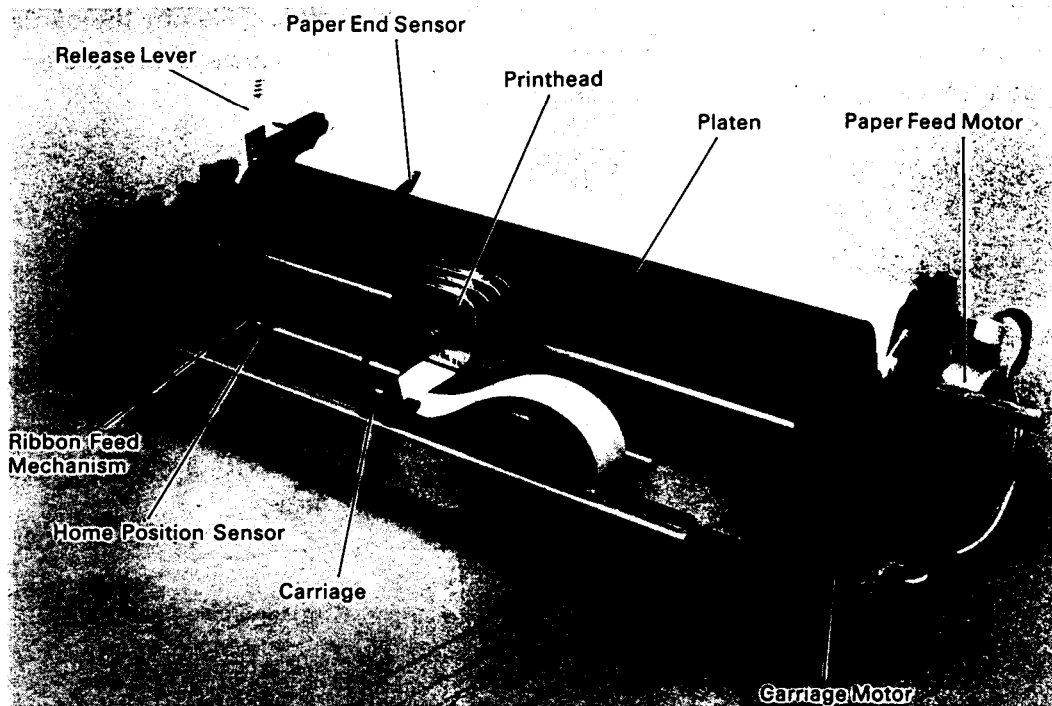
Printer Mechanism External View (Model-3A10)
